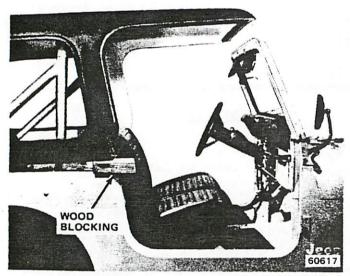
C-2 Hardtop Enclosure Suppported with Wood Blocking
